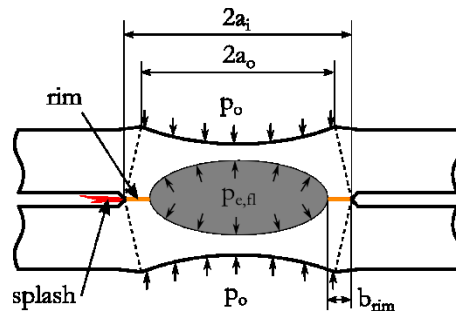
Enclosure of melt in the spot welding process.
